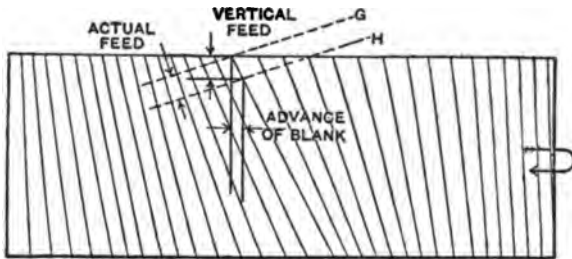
Cutting a Right-hand Spiral Gear with a Left-hand Hob
